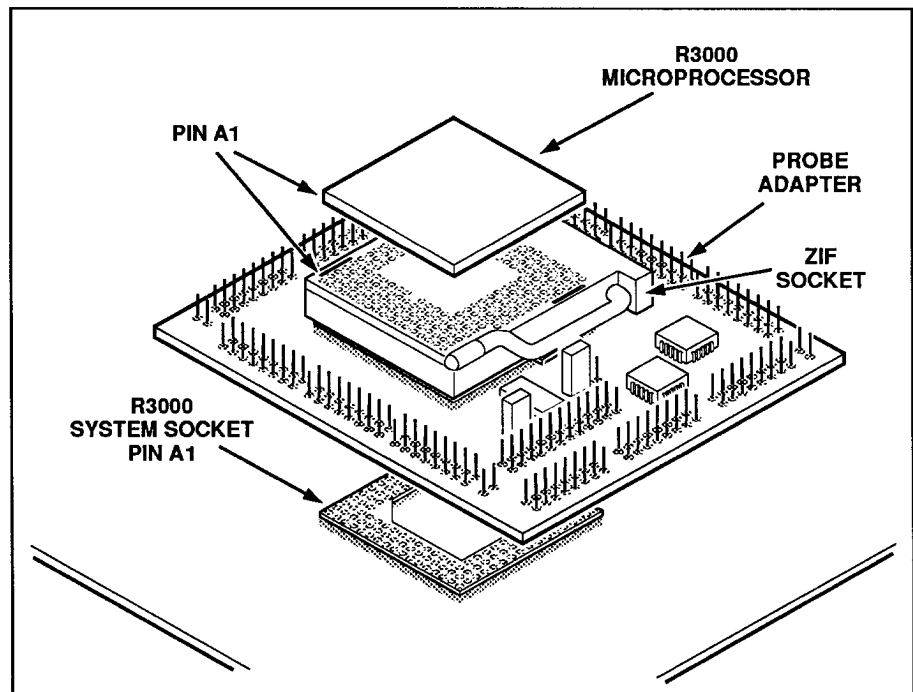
Placing the probe adapter in the R3000 system. The clock and 8-channel probes should already be connected before placing the probe adapter in the system. They are not shown connected in this figure because they would obscure the detail.
